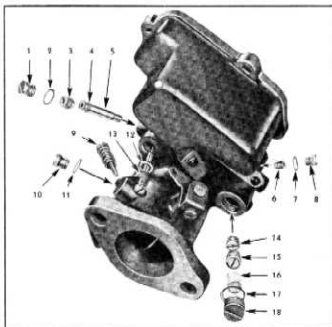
Carter Downdraft Carburetor Jets and Plugs
